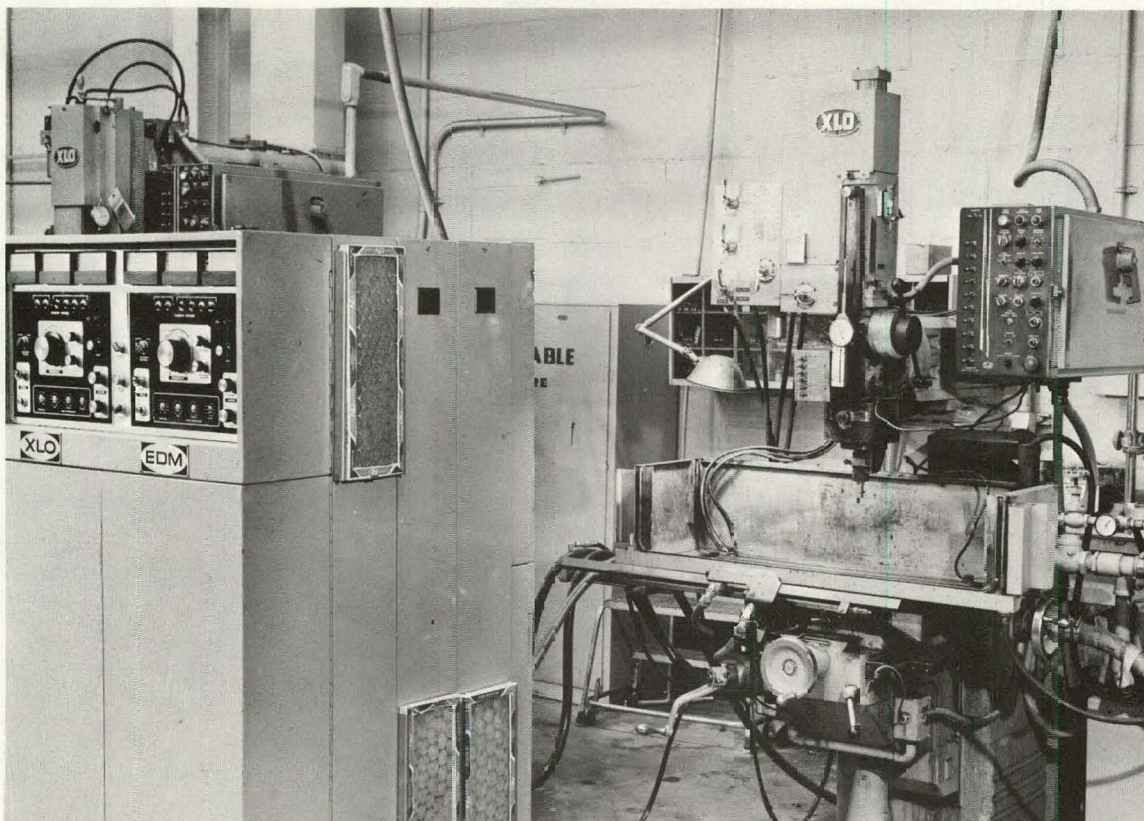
AN EX-CELL-O ELECTRICAL DISCHARGE MACHINE.
